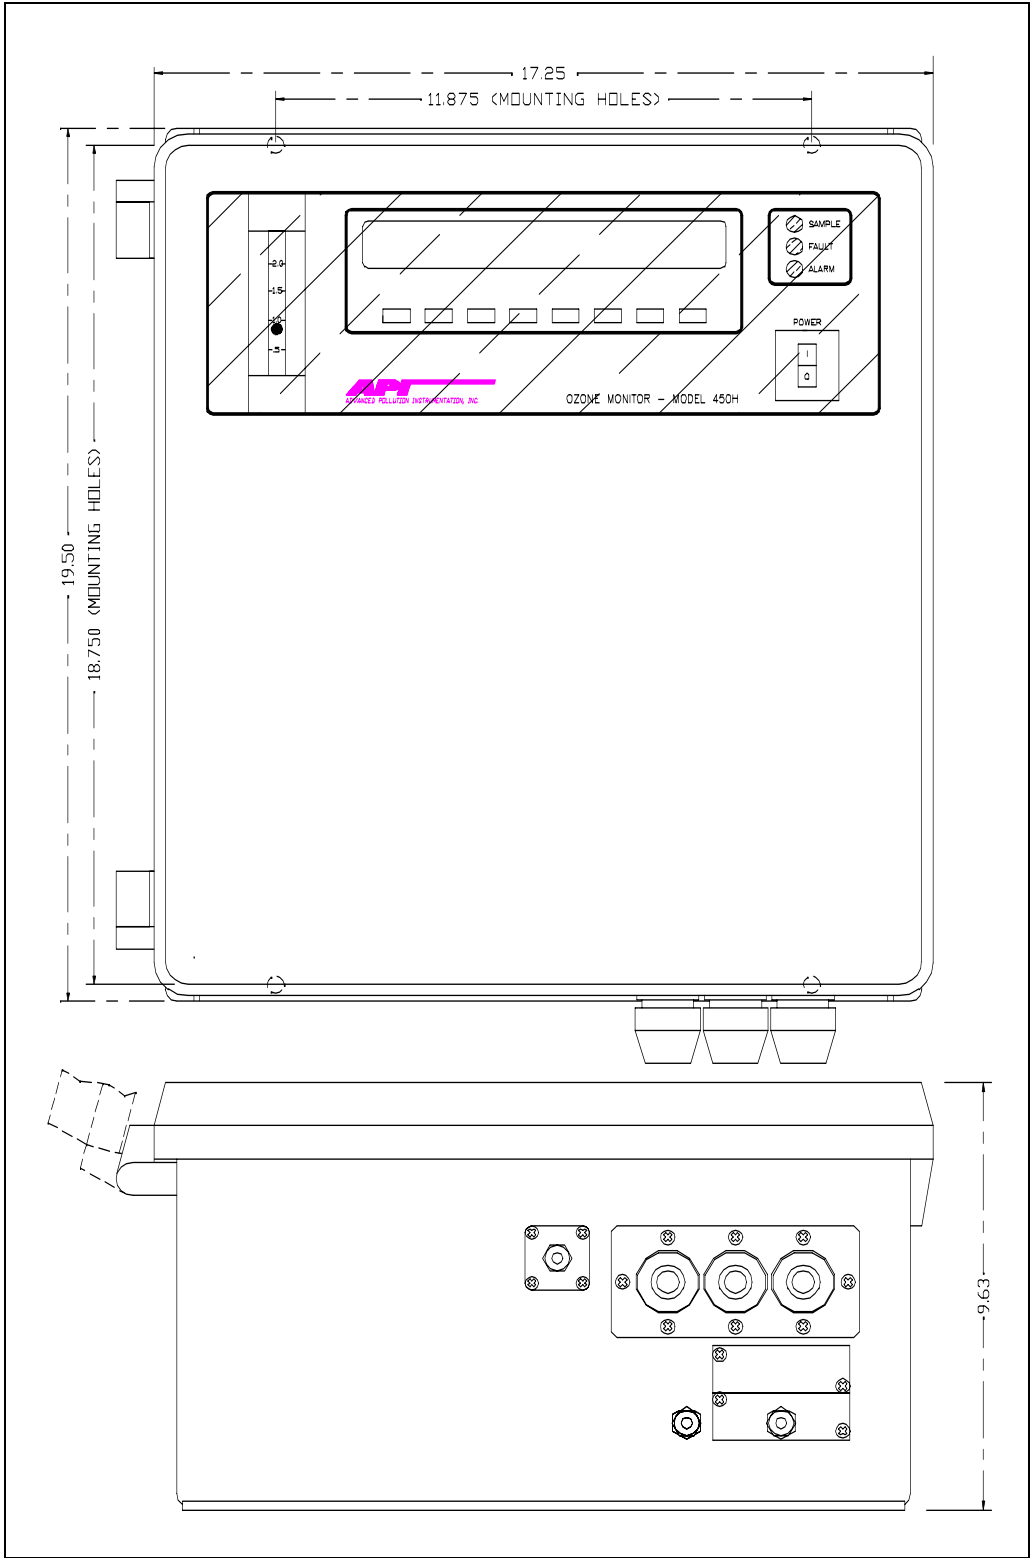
NEMA 4X MOUNTING HOLE DIMENSIONS
